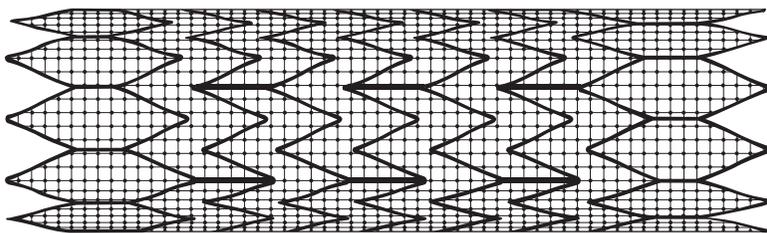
A: ENGINEERING DRAWING OF TAPERED STENT
